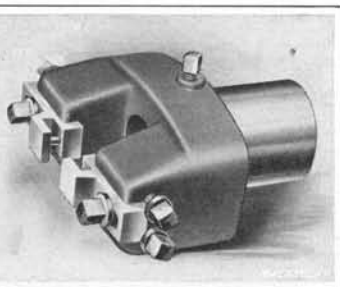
Standard Type of Knurling Tool-holder for Use on Turret Slide of Gridley Automatic Turret Lathe
